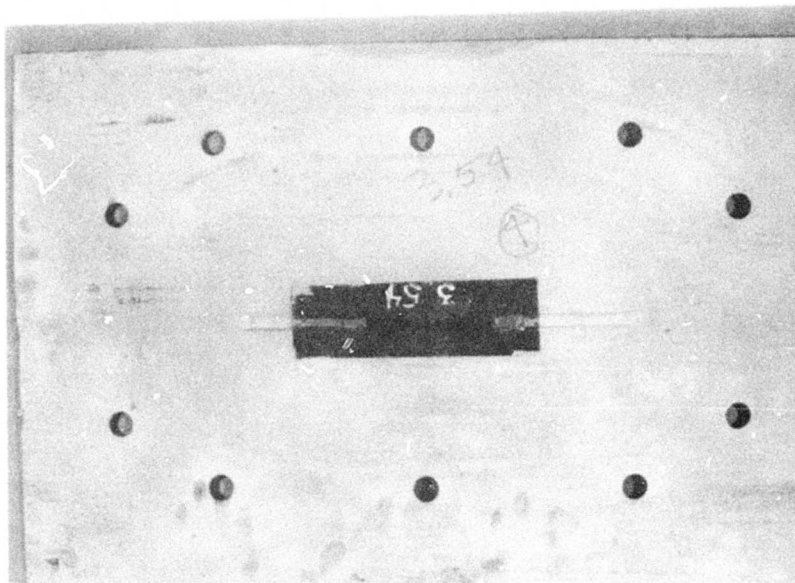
Butted plate with 12.1-in. (30.73 cm) slot length.
